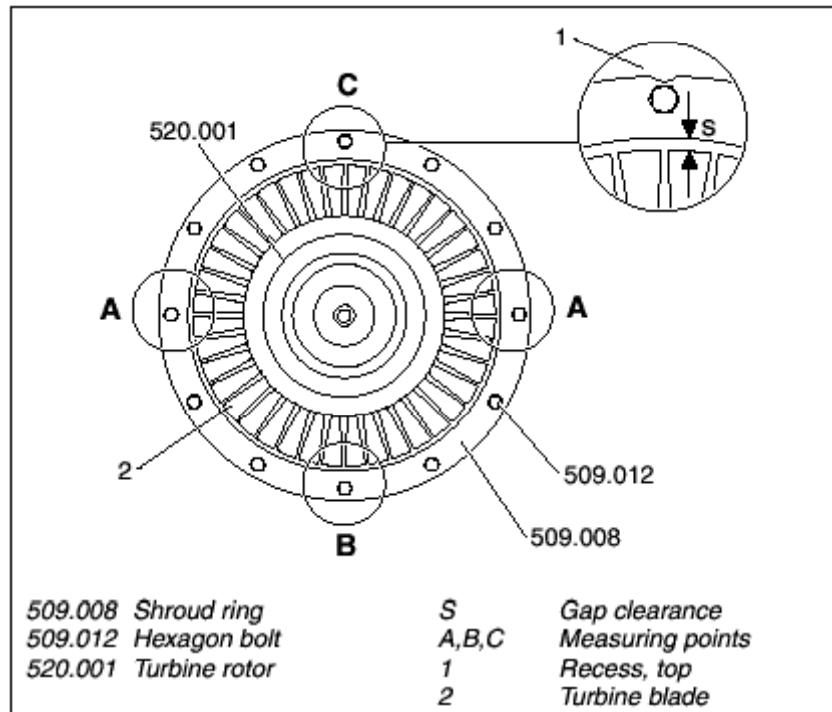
Measuring points for gap clearance of turbine blade/shroud ring
